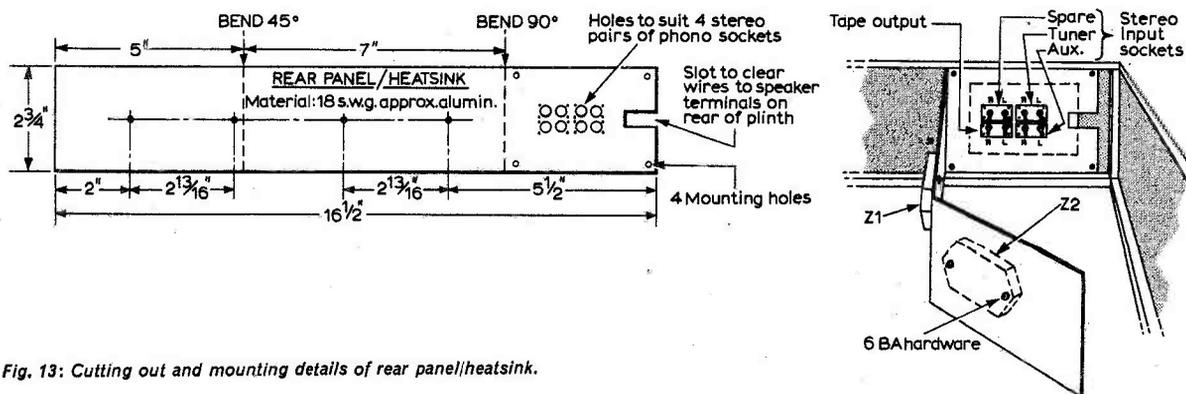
Cutting out and mounting details of rear panel/heatsink.
